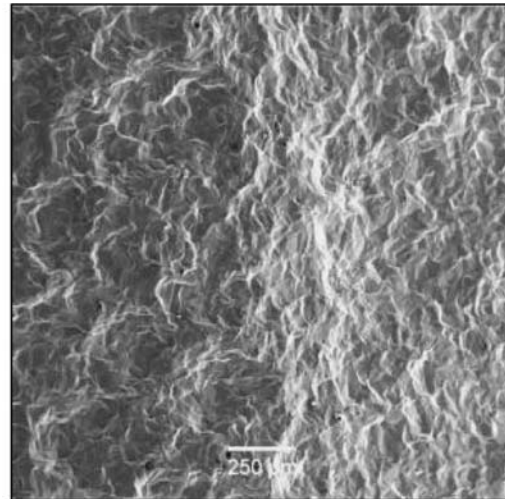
4 mm thick AISI 409 welded at a heat input of 0.10 kJ/mm (Modified Practice Z)
